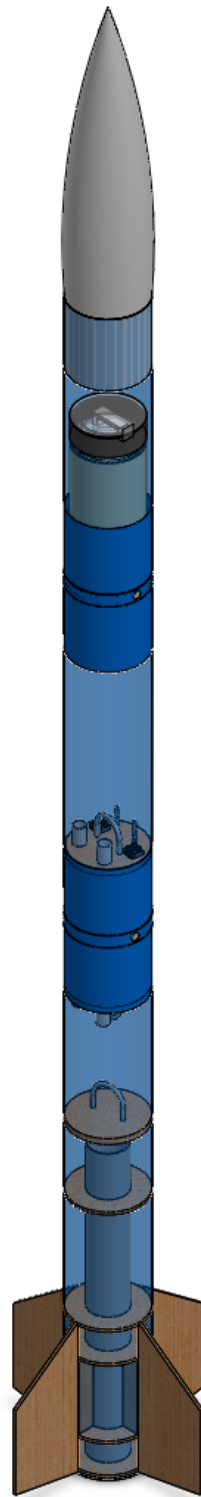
shows an internal view of the assembled rocket, including views of the booster section, mid frame, and payload bay.
